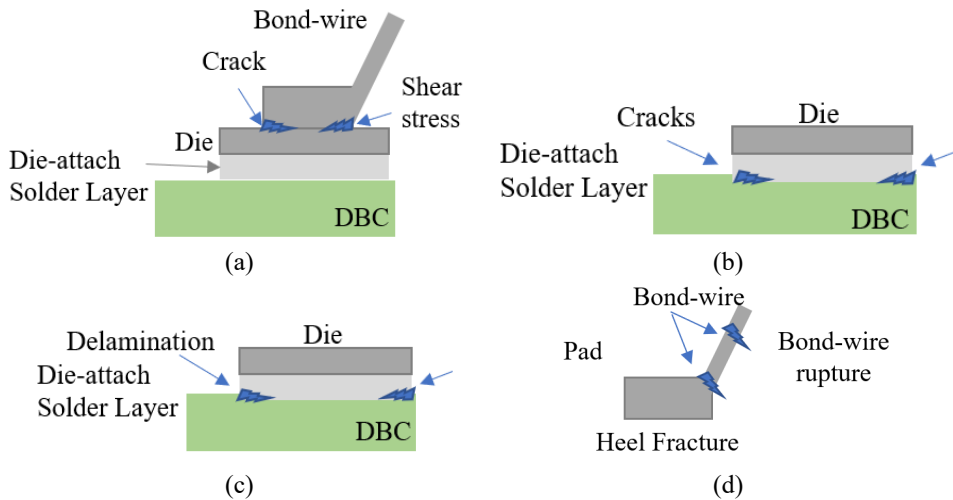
Mechanical defects causing IGBT field failures - a) shear stress crack at bond-wire and die junction, b) cracks at die-attach solder layer, c) delamination of die-attach solder layer from direct bonded copper (DBC), d) bond wire defects - rupture and heel fracture [26].
